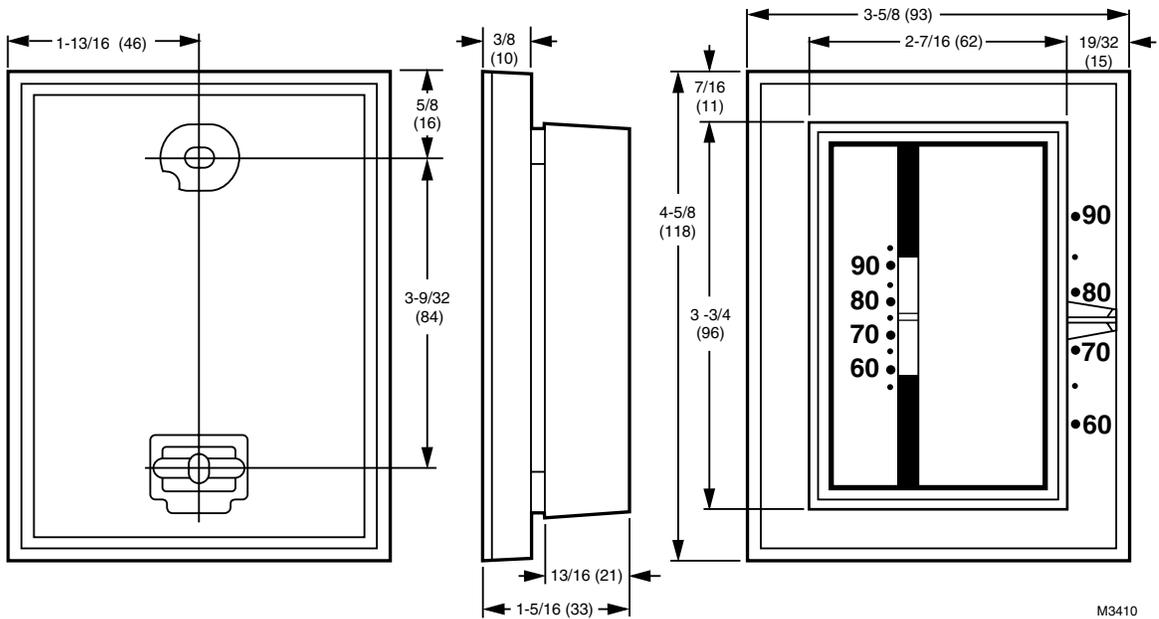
T7047 dimensions in in. (mm). T7047C,G do not include thermometer and external setting lever.
